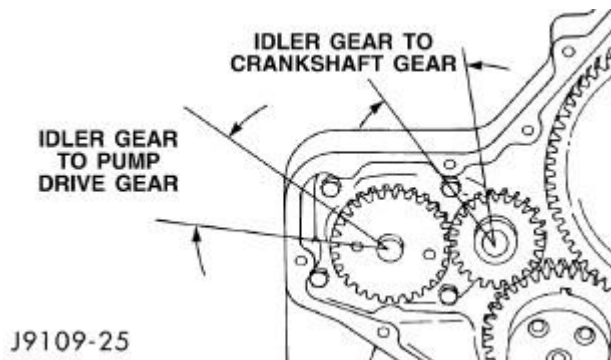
Idler Gear to Pump Drive Gear and Crankshaft Gear Backlash
